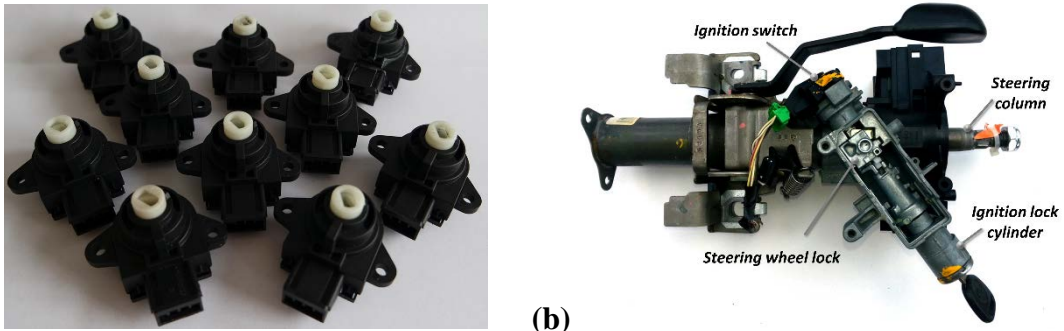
Set of ignition switches consisting of (a) 10 service replacement parts and (b) one sample from a steering column assembly.
